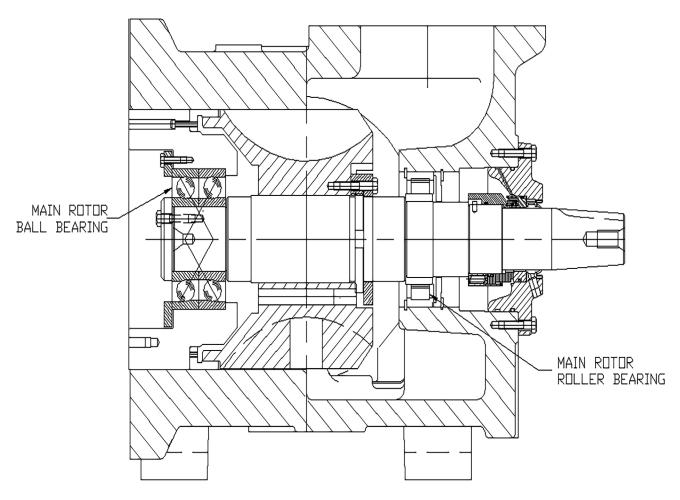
Main Rotor Cross-Section VSCC Compressors
